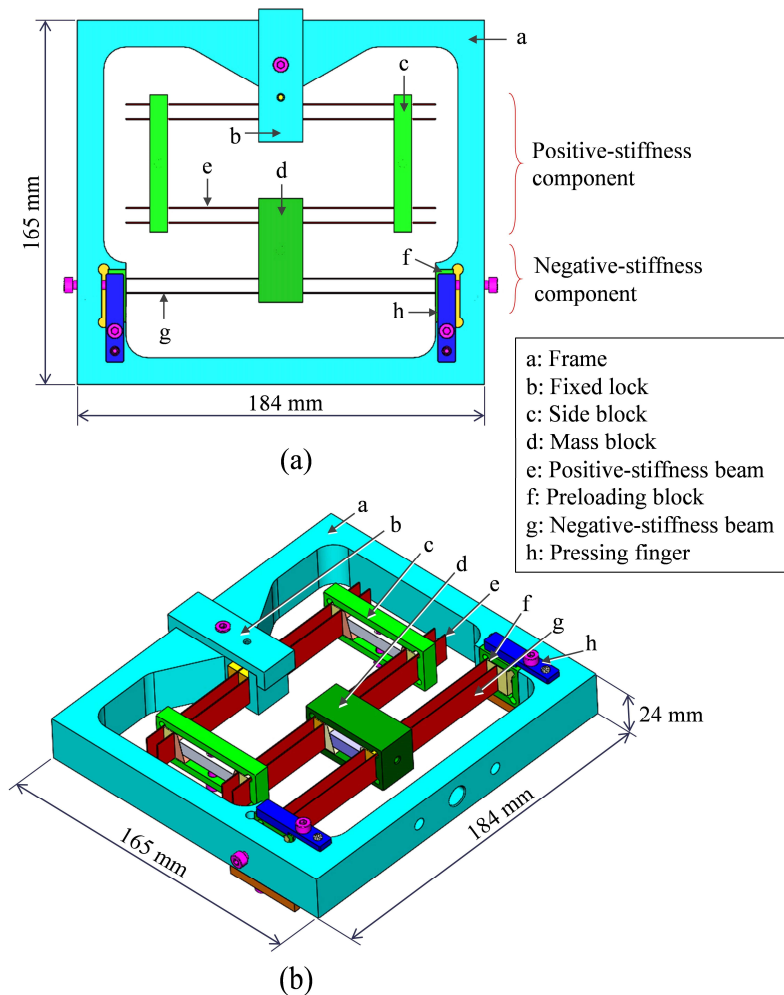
3D model of the SBCM prototype in (a) front view and (b) isometric side view.
